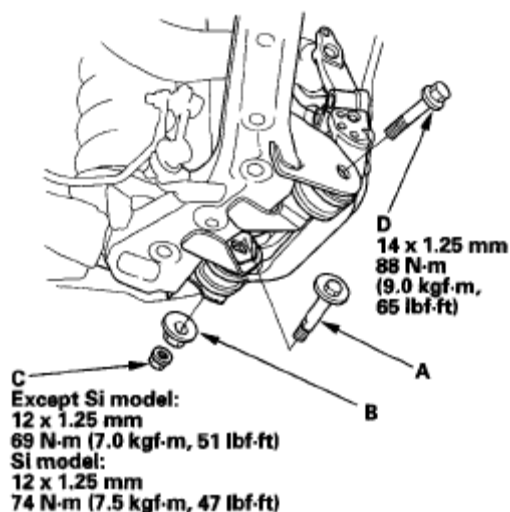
Identifying Adjusting Bolt, Cam And Self Locking Nut (With Torque Specifications)
